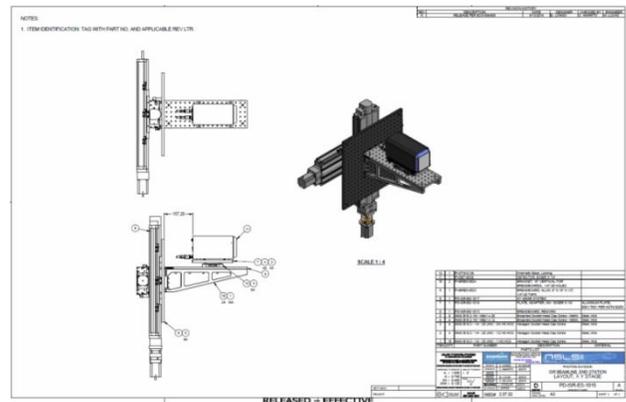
ISR: Assembly drawing of the Eiger pixel array detector mounted on the XY stages.
